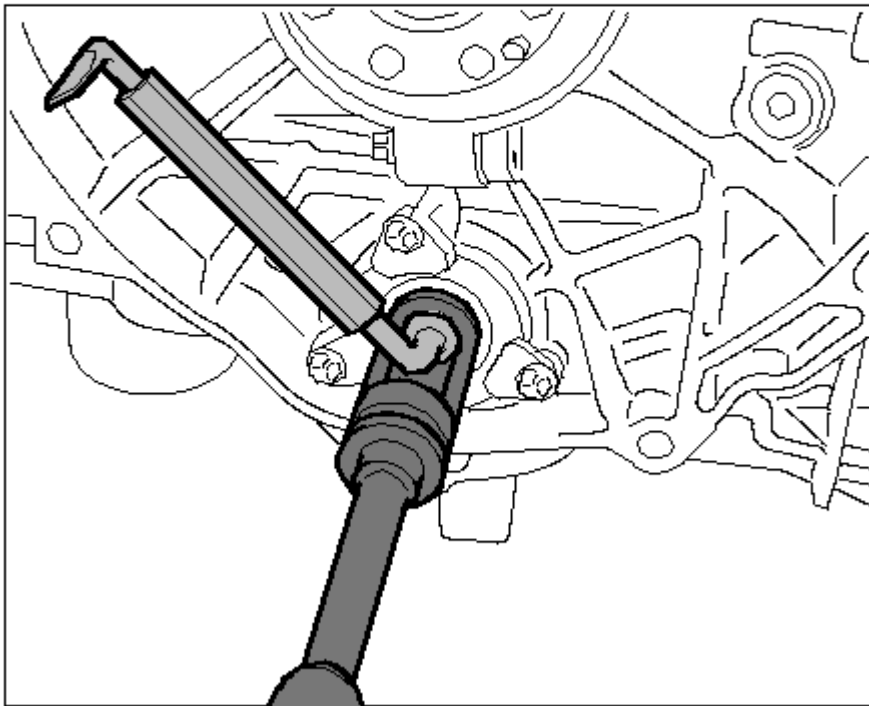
Threaded joint with collar nut on bearing cover for intermediate shaft
